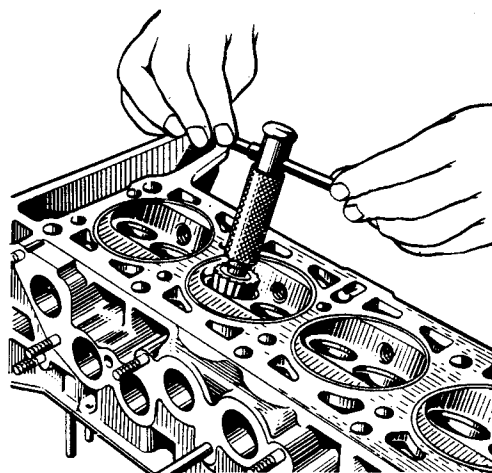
Chamfering Valve Seat Face with Counterbore Installed on Spindle A.94058
